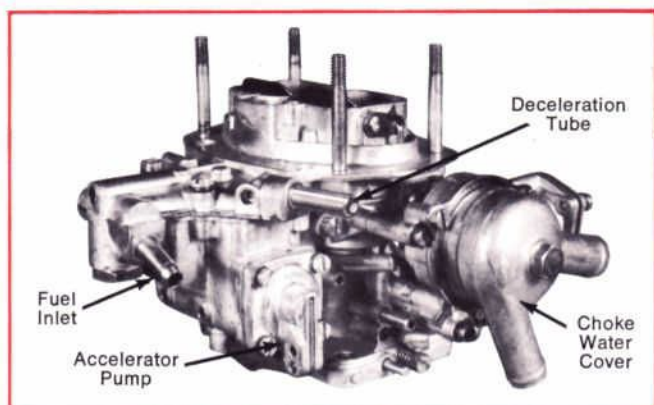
Fuel Inlet, Accelerator Pump and Choke Side
